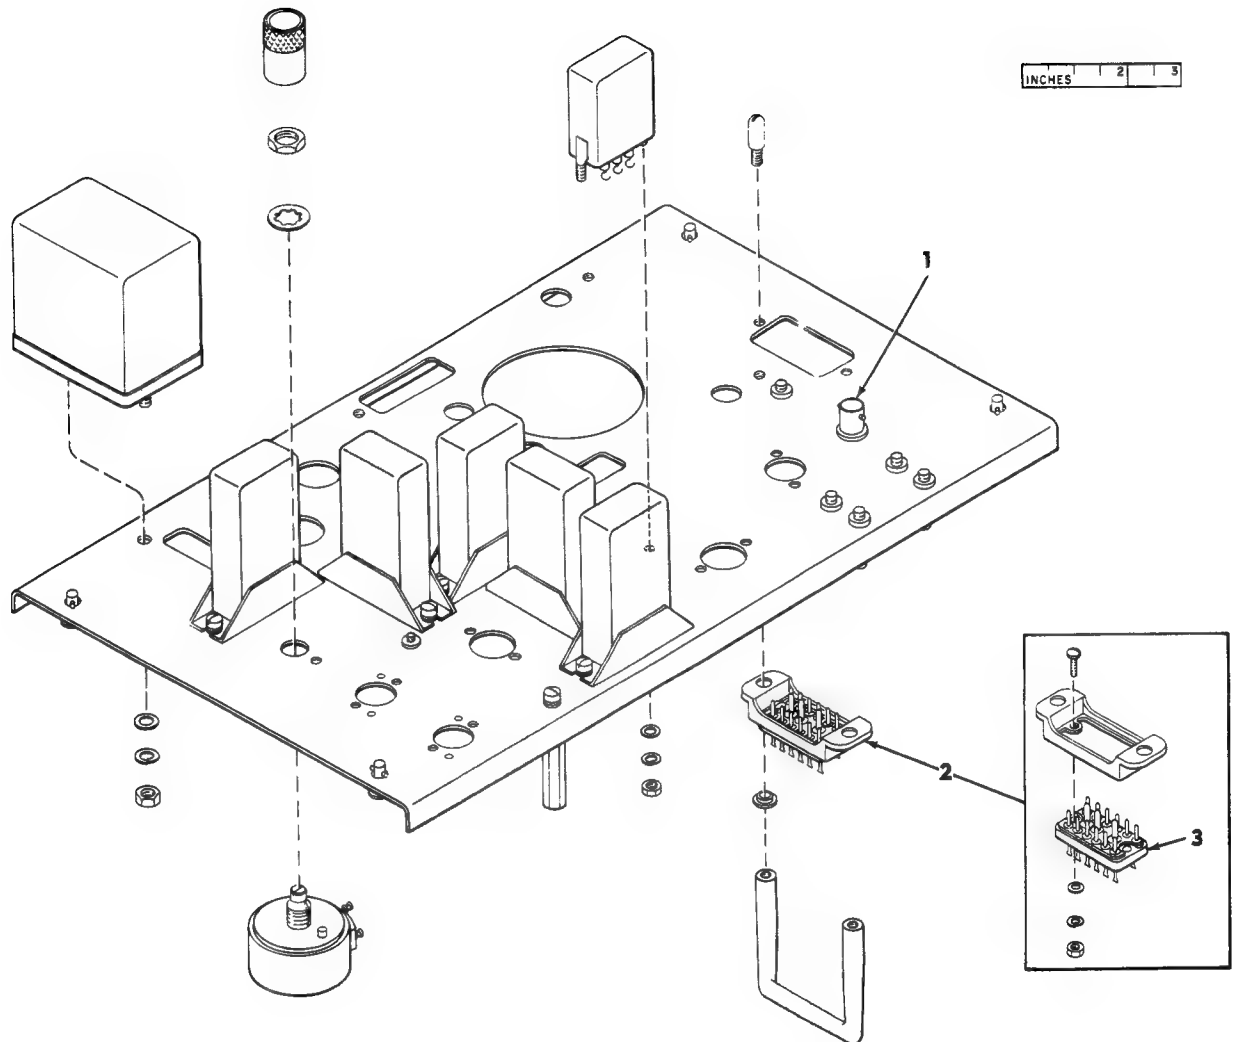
Oscilloscope OS-49/M (8007722)—partial exploded view
